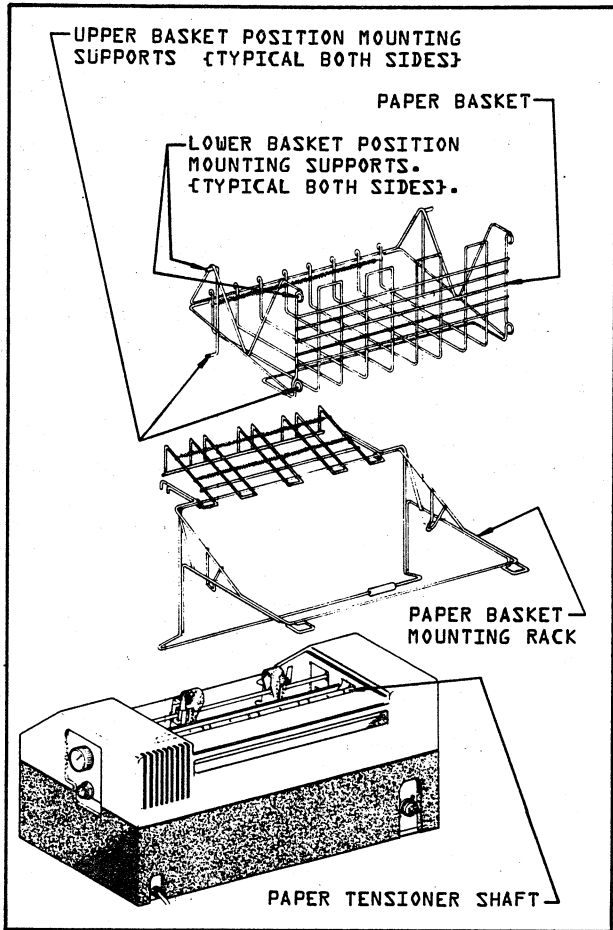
PAPER BASKET OPERATION (Basket shown in lower mounting position)
